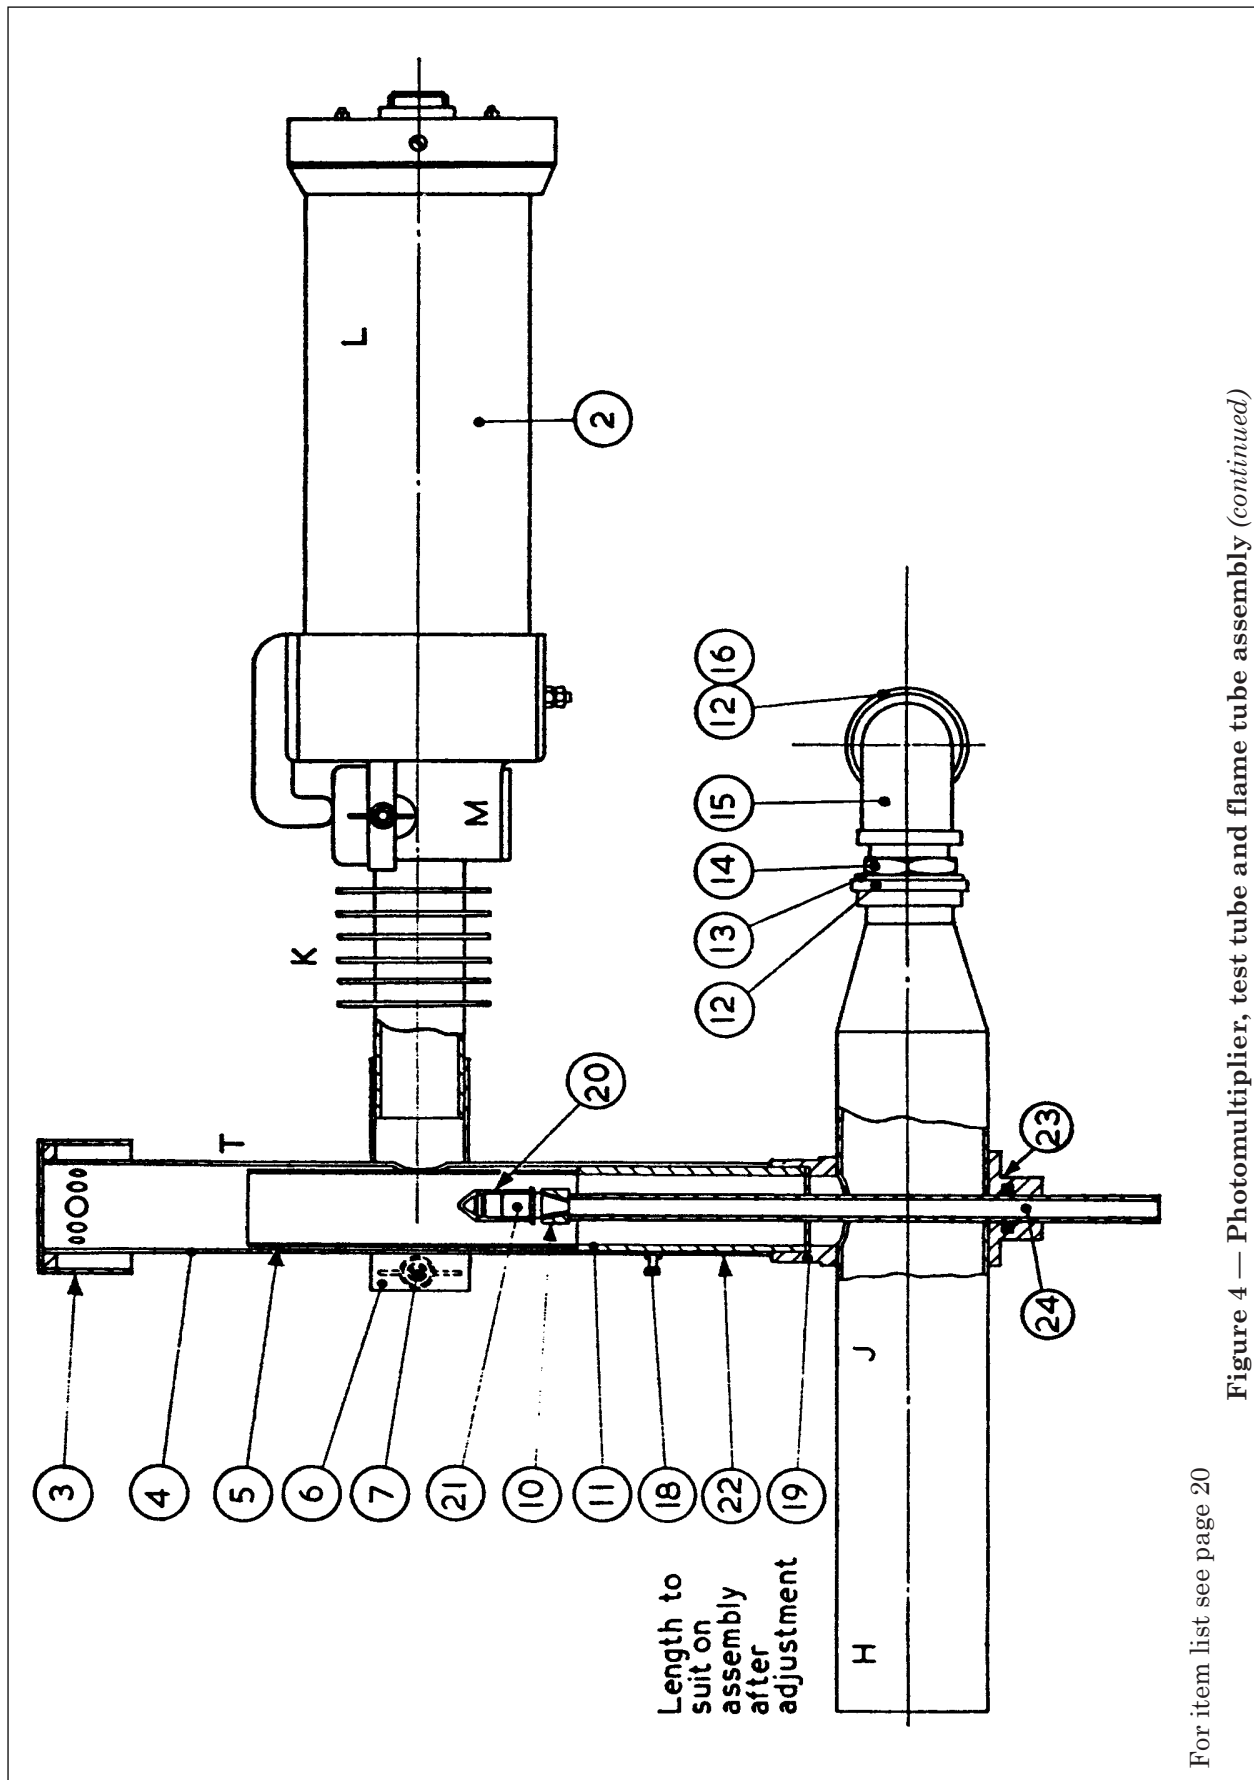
Photomultiplier, test tube and flame tube assembly (continued)
